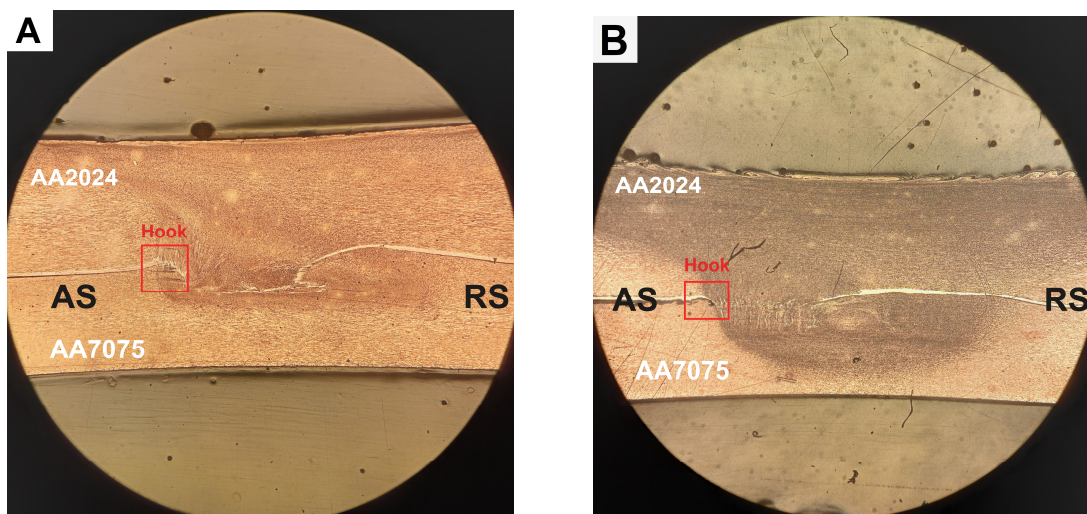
The hook defect on welds: A (30 mm/min), B (6mm/min)
